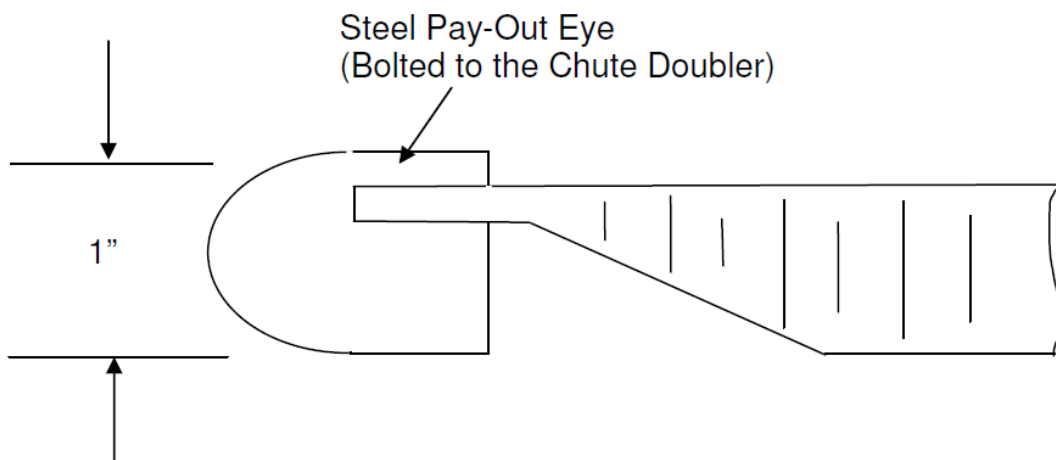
Design Concept for Steel Ring around the Chute Door Opening
